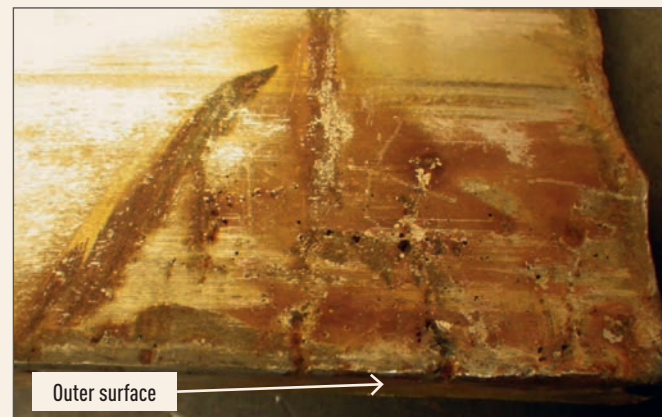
Corrosion pits on the end of the wear ring at the outer surface of the impeller wear ring.
